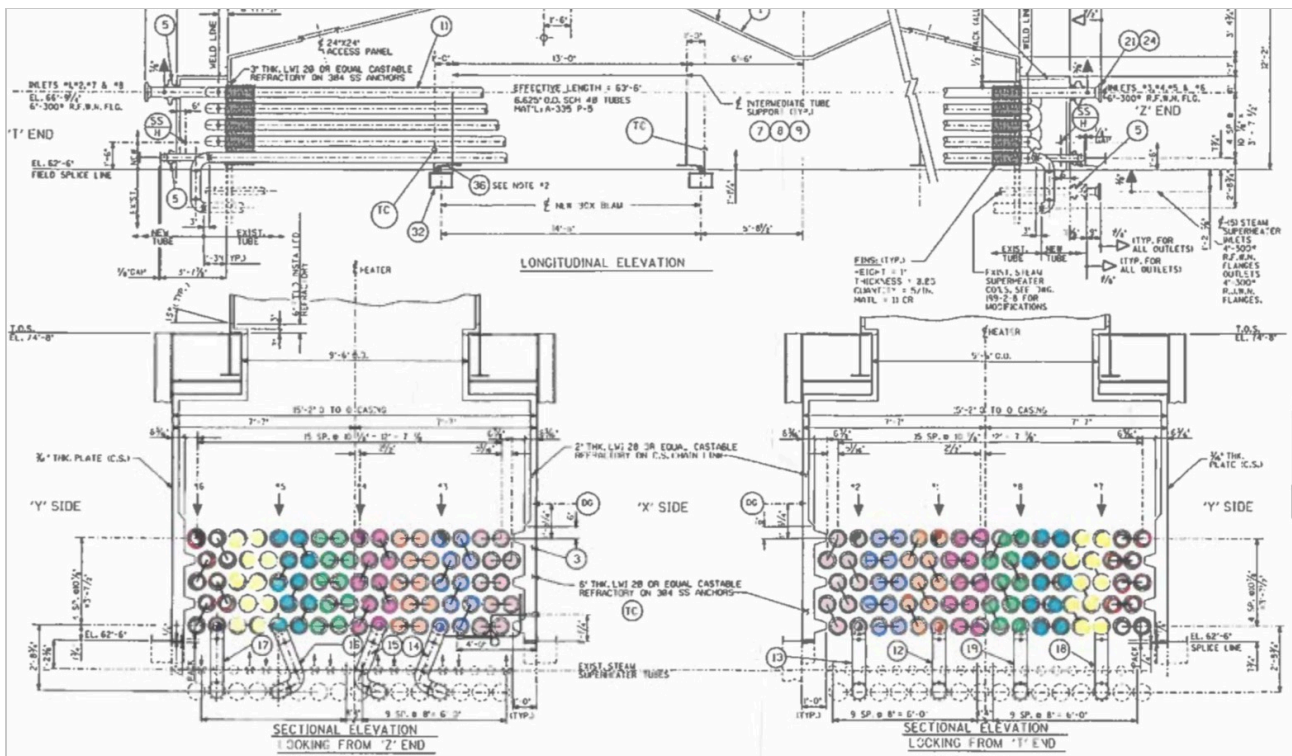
LONGITUDINAL & SECTIONAL ELEVATIONS
